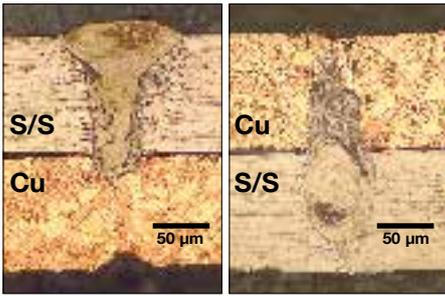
Overlap weld of 1.4303 stainless steel and copper E-Cu58, $t = 0.1$ mm, $P = 200$ W, $f = 50$ mm, $v = 30$ m/min
